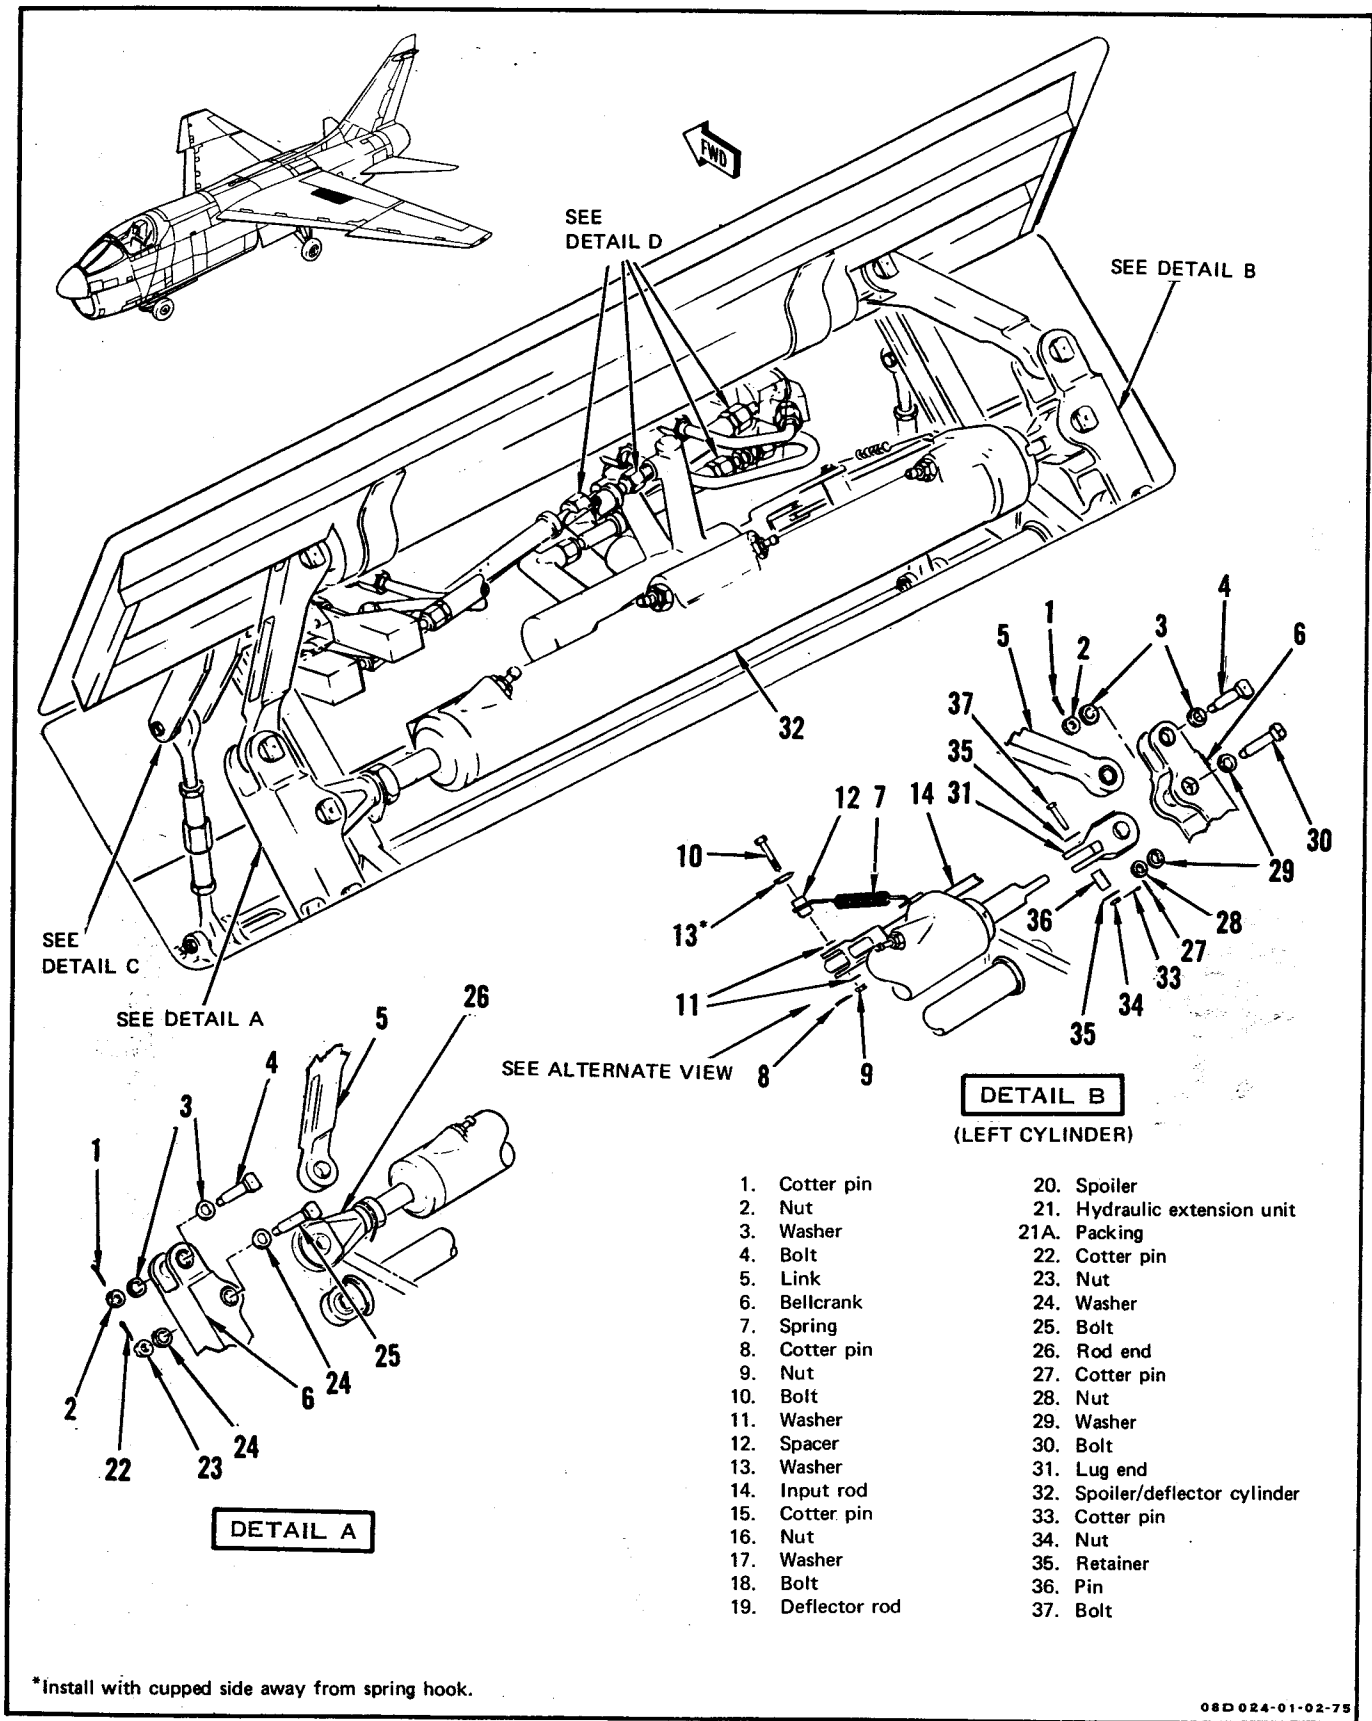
Spoiler/Deflector PC Cylinder Removal and Installation (Sheet 1)
